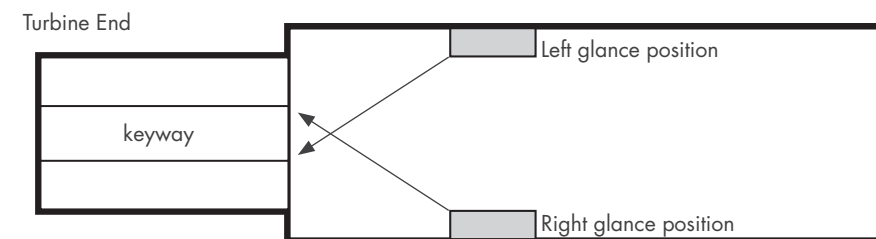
Ultrasonic probe positioning for inspection of generator keyway shaft cracking
